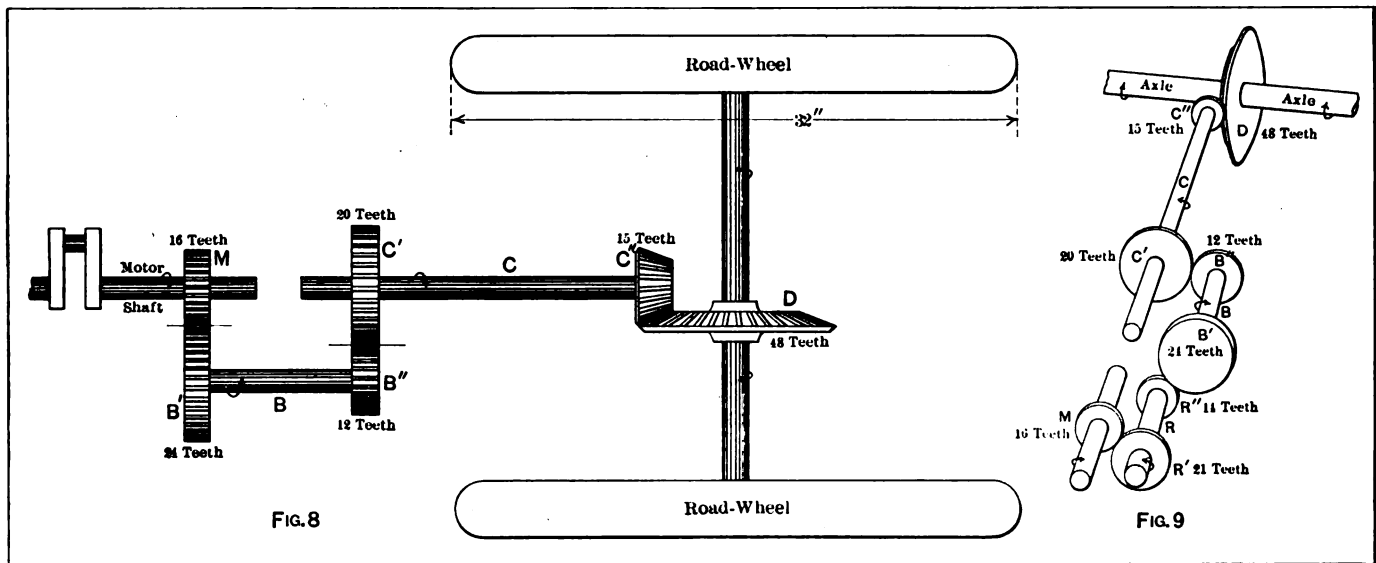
Power transmission through change-speed gears. Fig. 9—Transmission gearset including reverse gear
